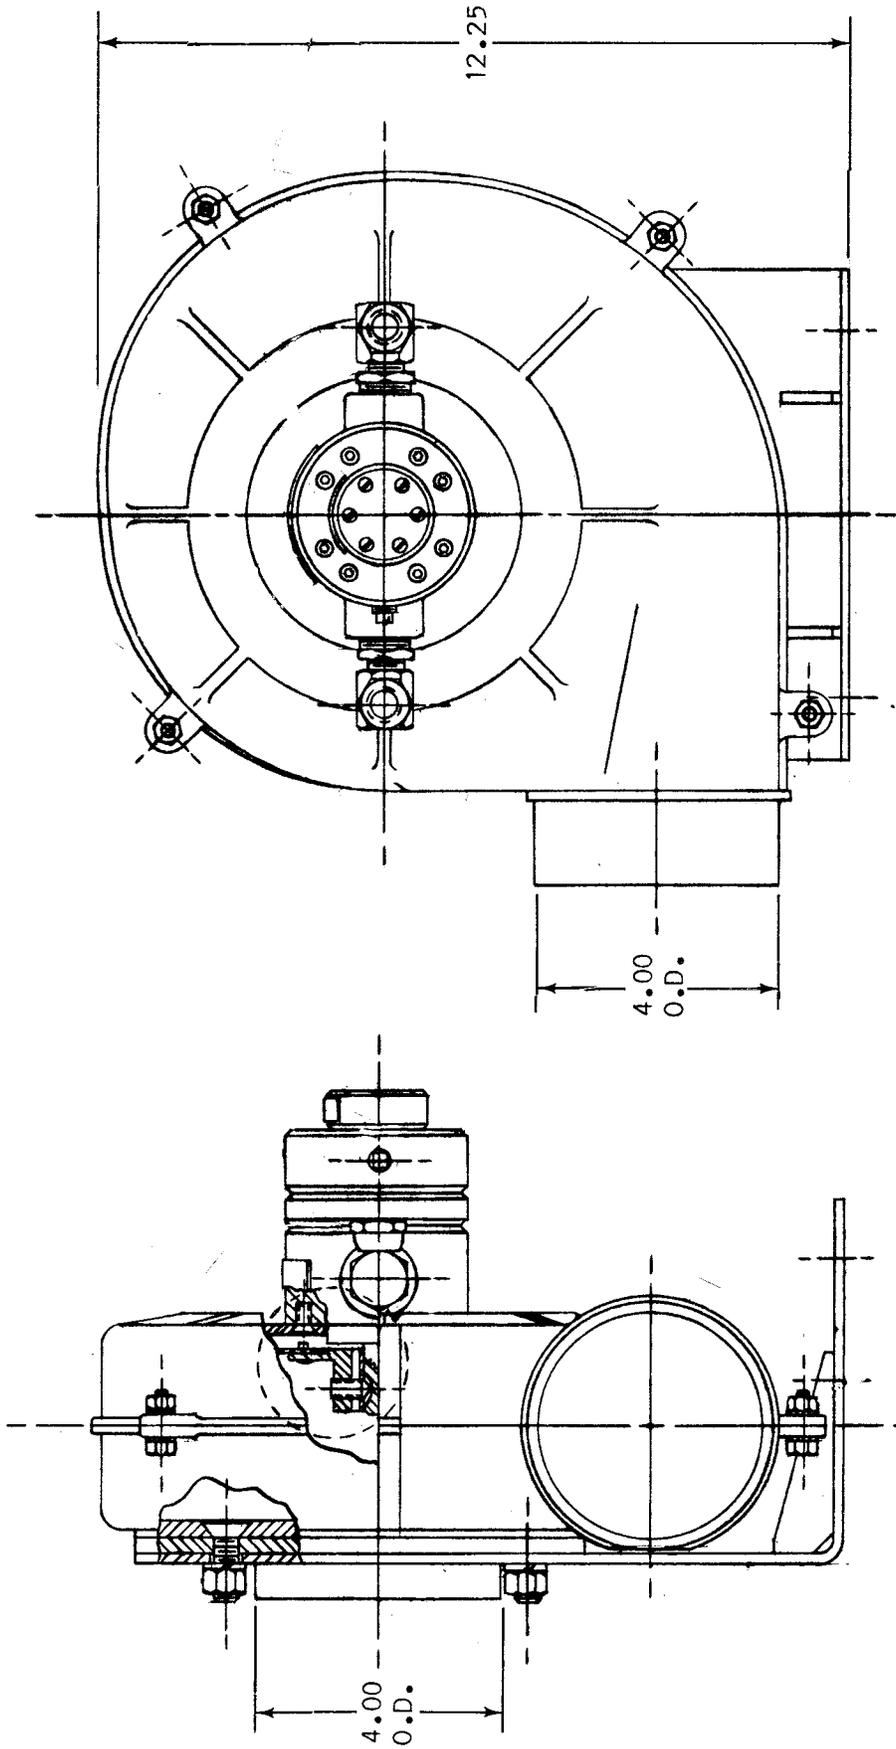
8-Inch Squirrel Cage Fan with Hydraulic Motor
